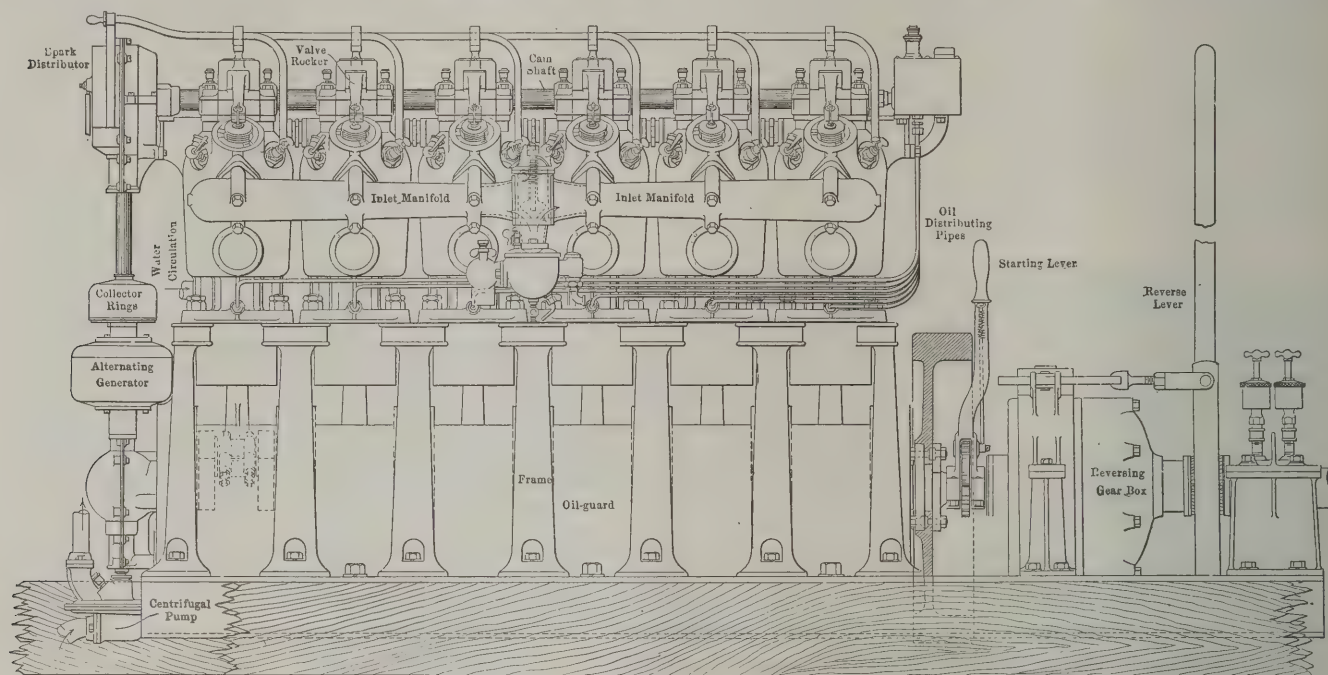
Side Elevation Hurd & Haggin Six-cylinder Engine, showing the Inlet Manifold.
